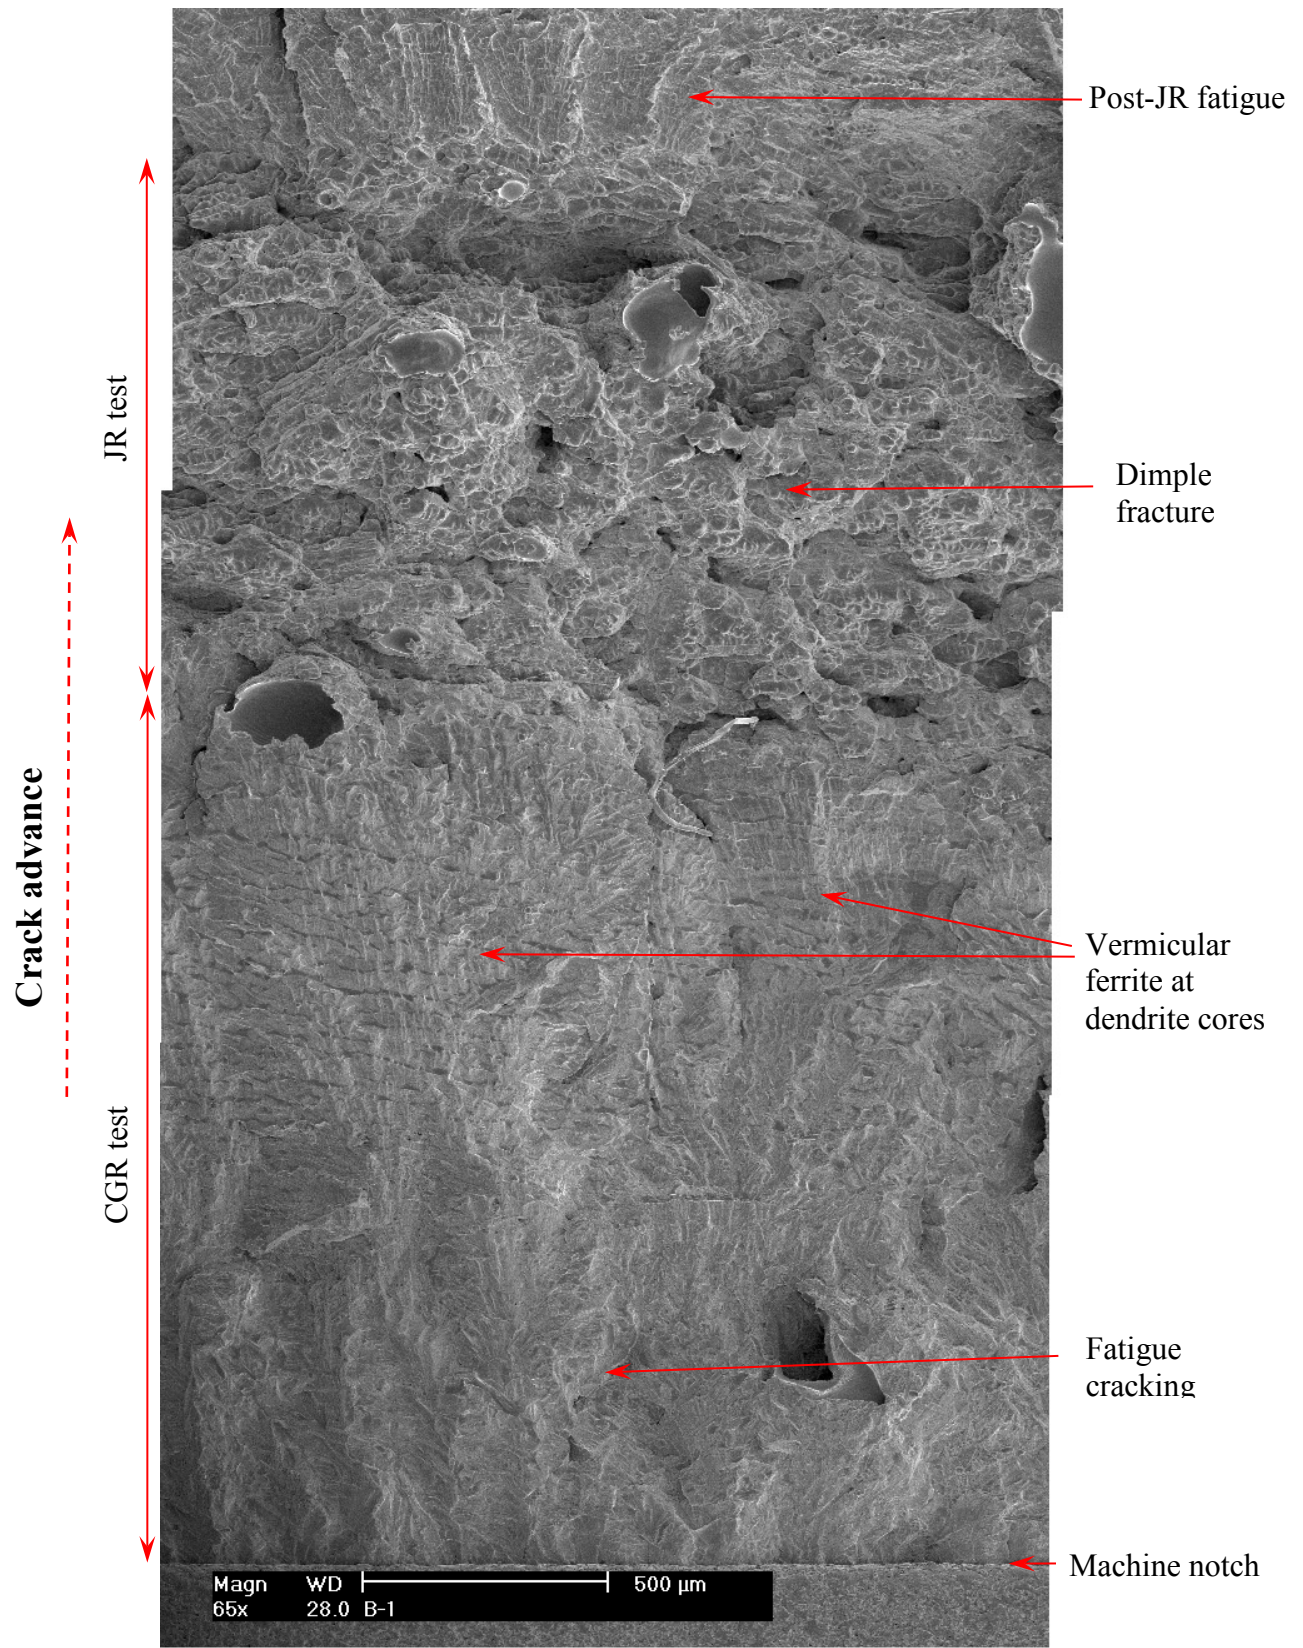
Fracture surface of specimen B-1 along the sample central line.
